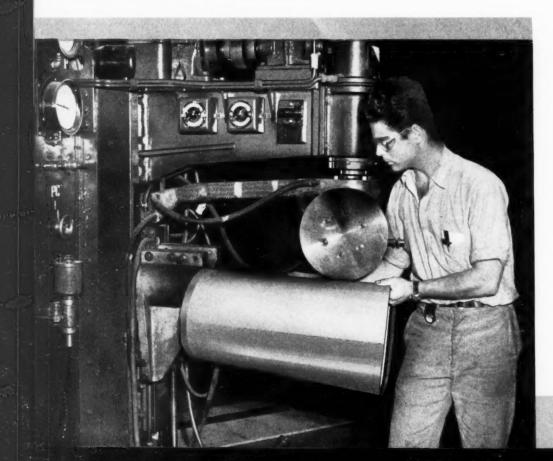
Spot-welding Operation in which a Roller Type Electrode Makes an Air-tight Seam in Air Ducts
